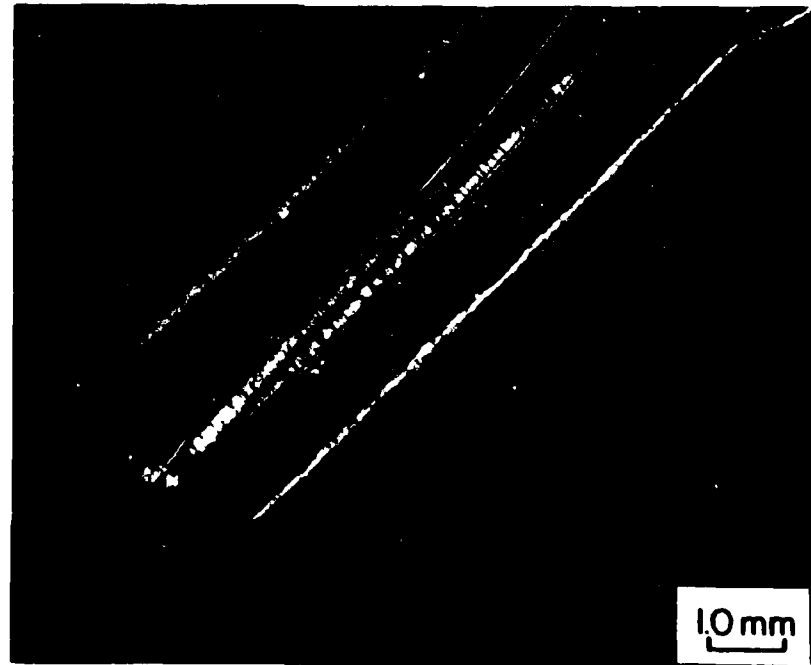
Thermocouple weldment profile at the bottom of a thermocouple well.
